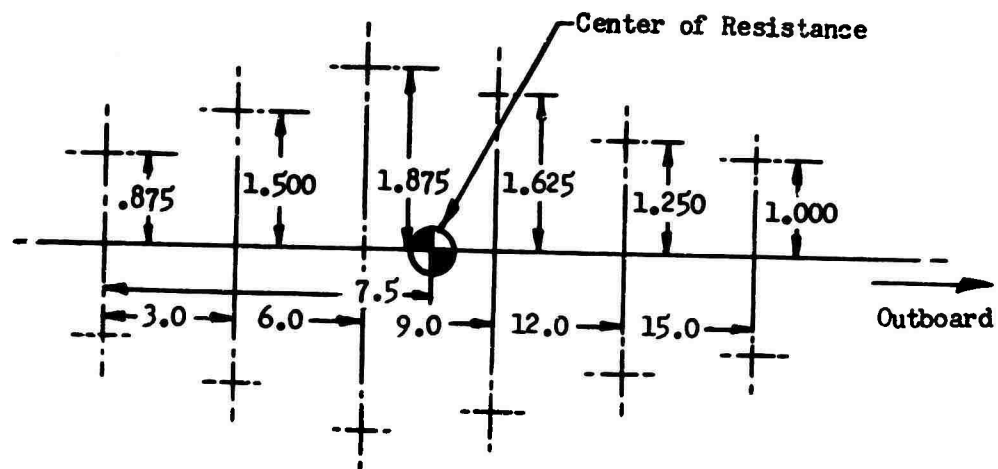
Cuff-to-Spar Attachment Bolt Pattern
